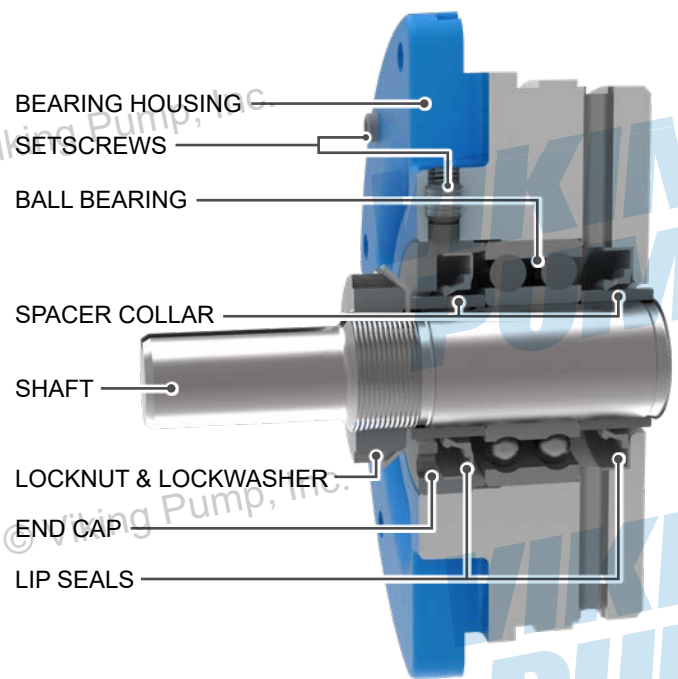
BEARING HOUSING ASSEMBLY (K, KK, L, LQ, LL, LS)
